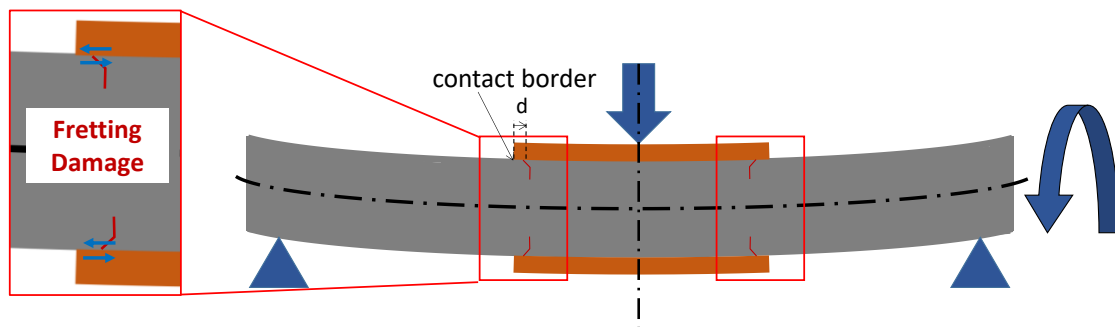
Fretting-fatigue between sleeve and transmission shafts.
